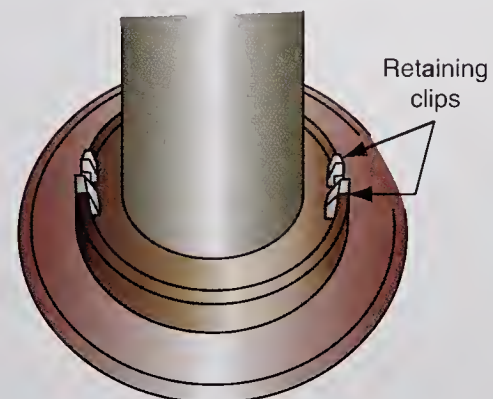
Depressing the retaining tabs on the bottom end of the air spring.
